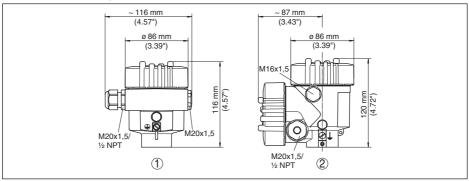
Housing versions in protection IP 66/IP 68 (0.2 bar) - with integrated display and adjustment module the housing is 9 mm/0.35 in higher
